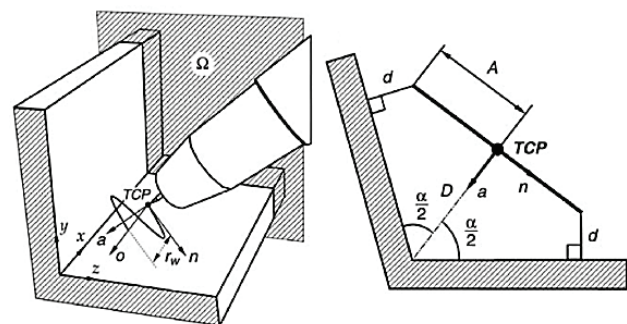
Direction and orientation of the welding gun during welding [5]; TCP – Tool Center Point; a – tip of the tool axis; o – direction of motion axis; n – normal axis on tool axis; r_w – weave width; d – nozzle tip to work-piece distance (on the edges); D – nozzle tip to work-piece distance (in the centre); A – weaving amplitude; Ω – vertical plane with respect to direction of motion.
